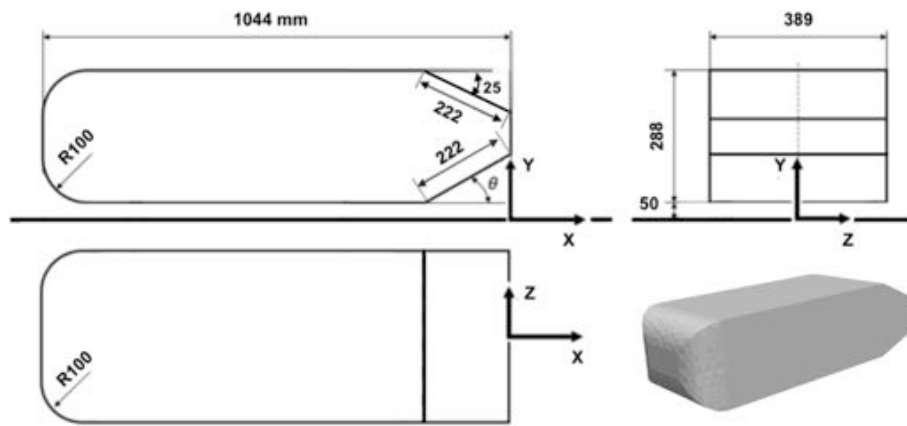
Schematic drawing of the Ahmed body with slant angle of 25° equipped with rear underbody diffuser.
